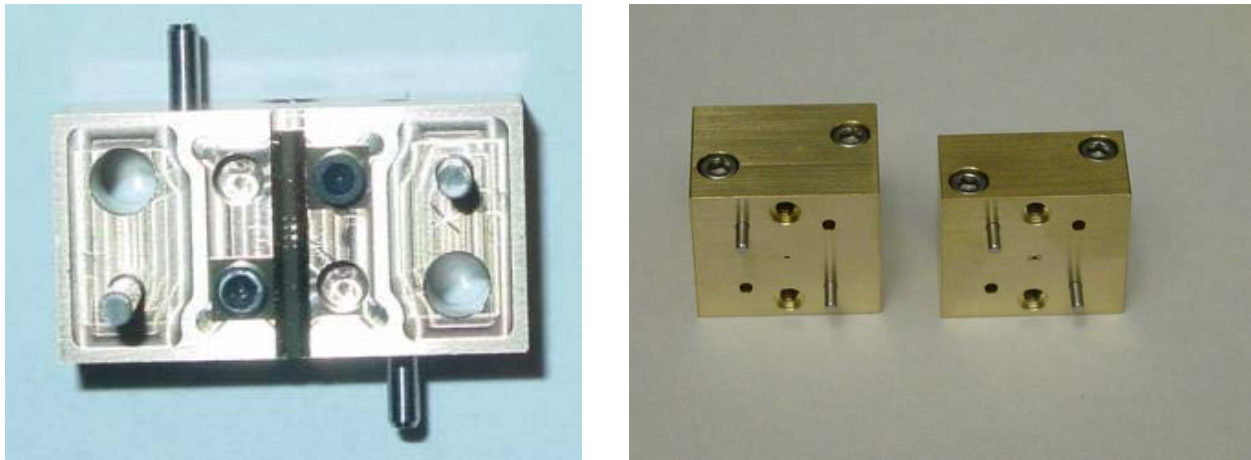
a) Top view of half of the brass fixture and b) assembled brass fixtures for 400 GHz measurements.
